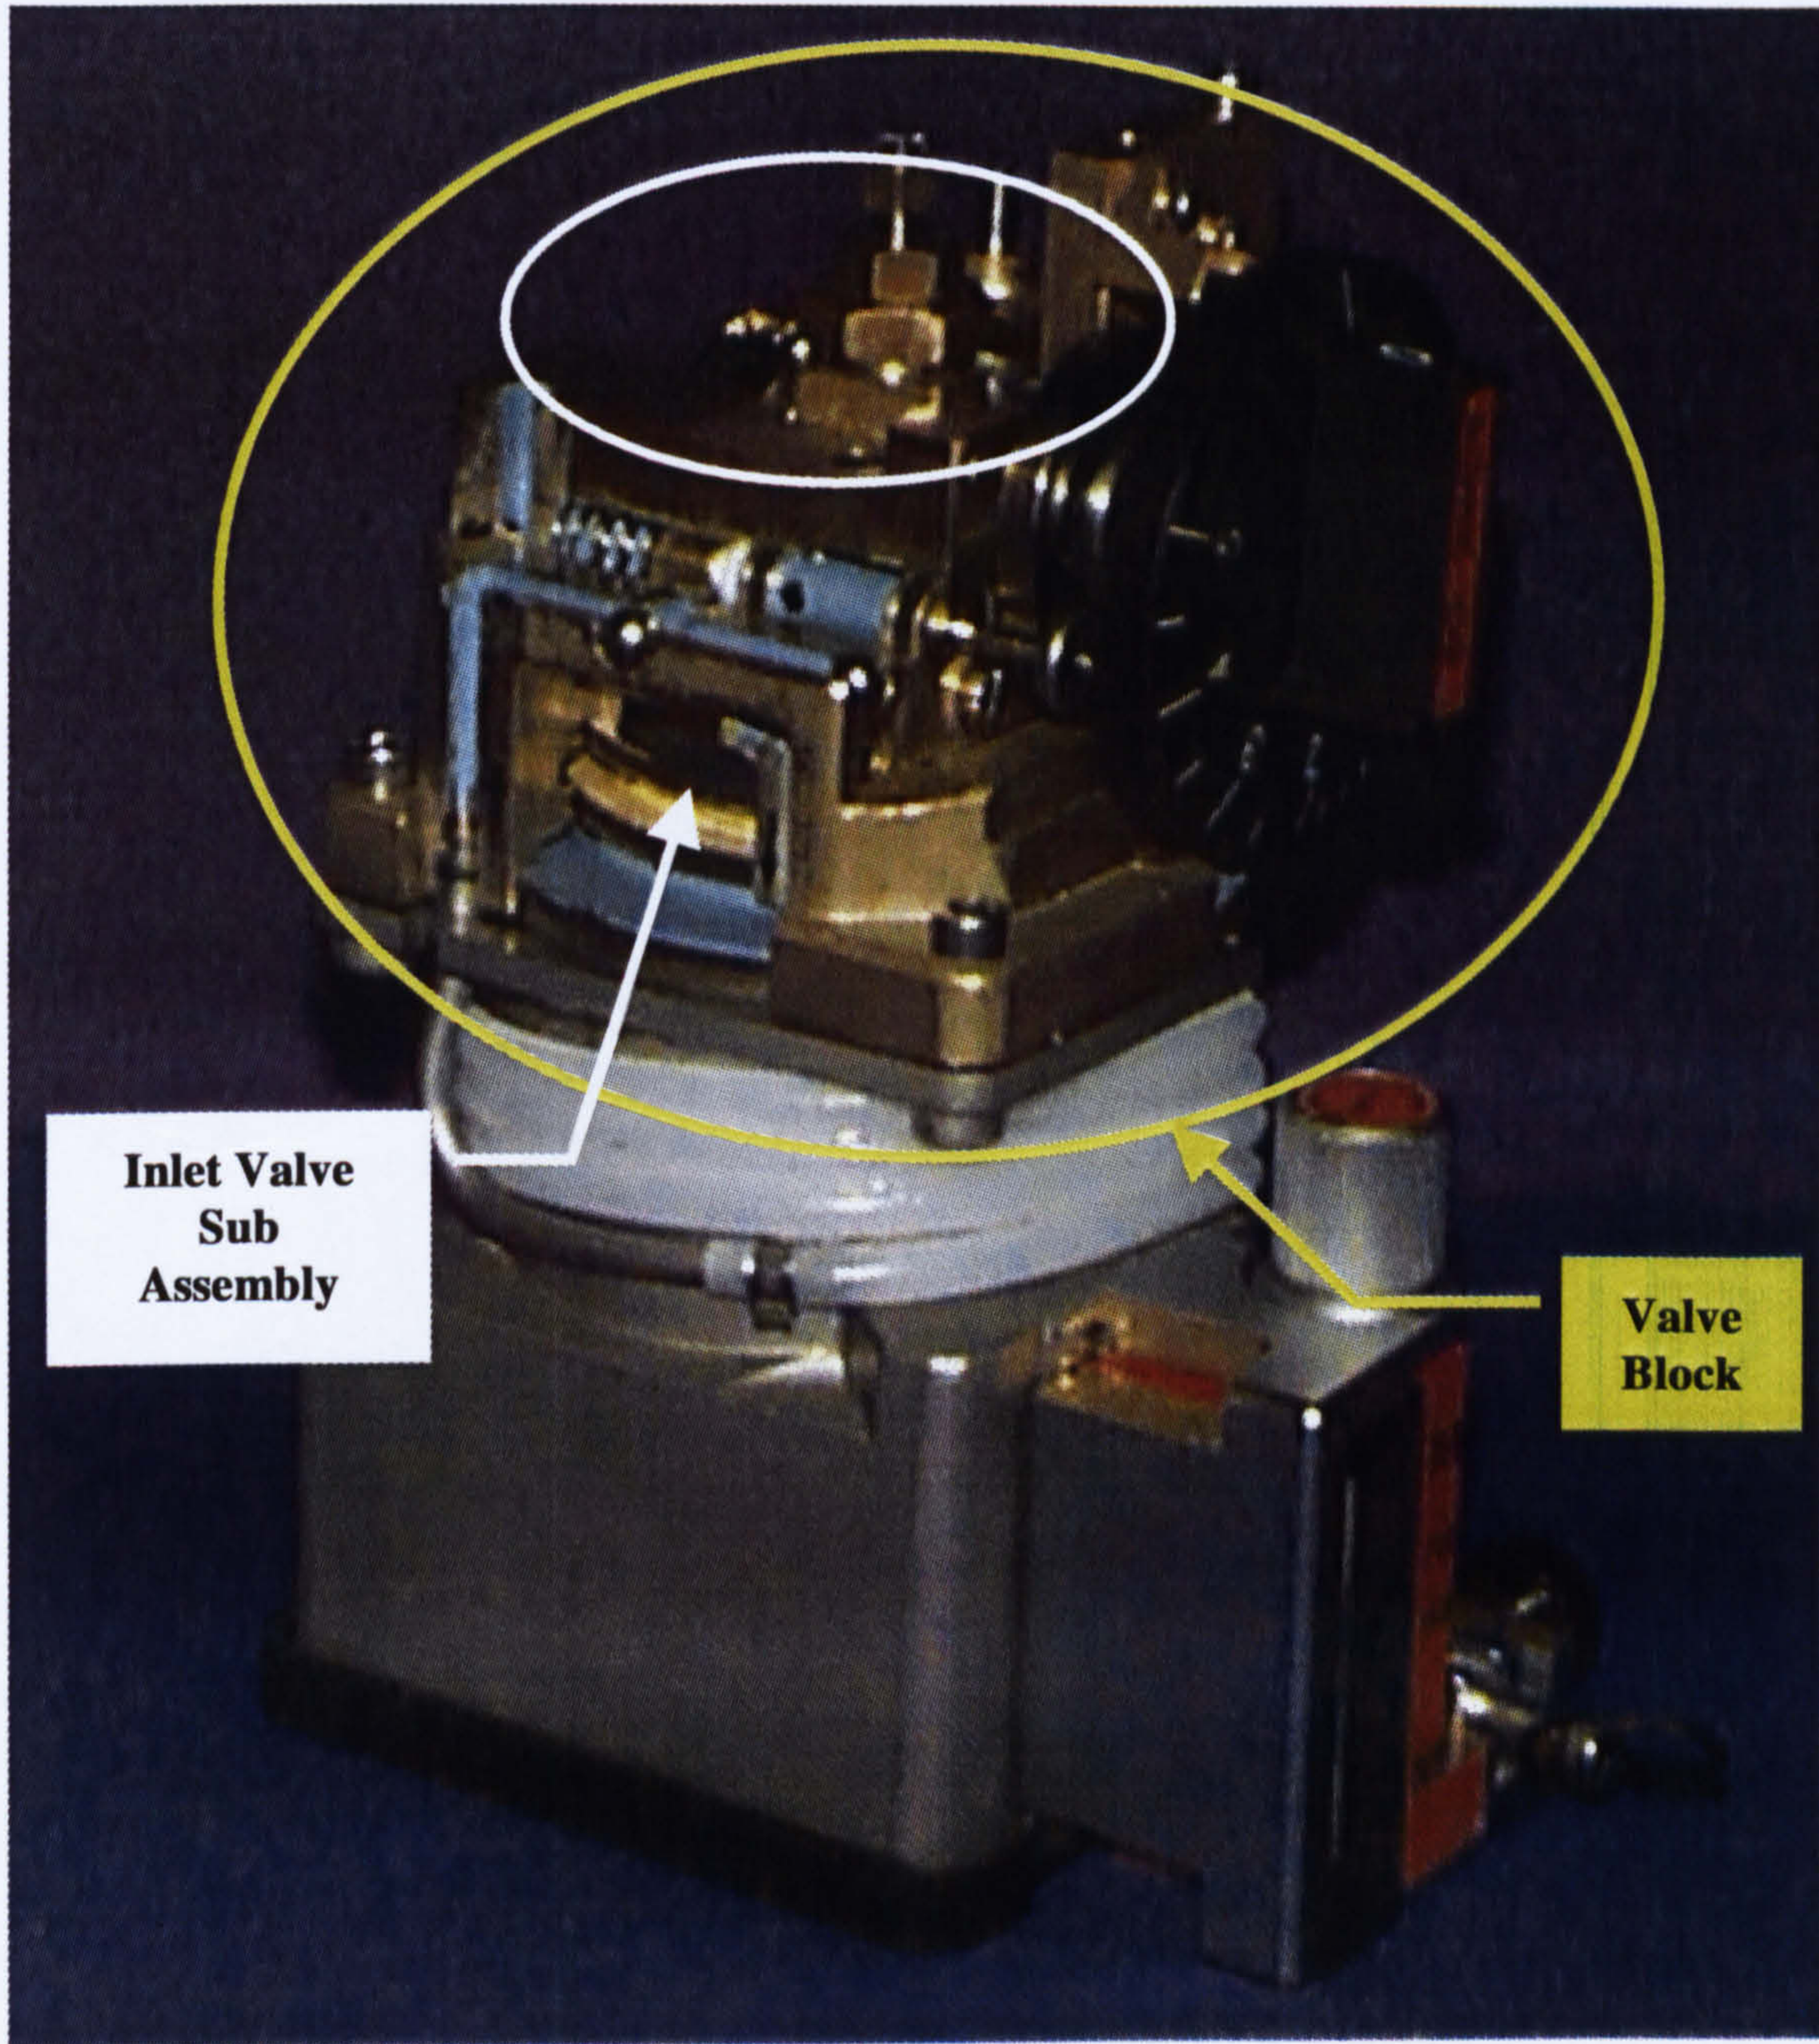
Valve Block of Vaporiser Showing Inlet Valve Subassembly
